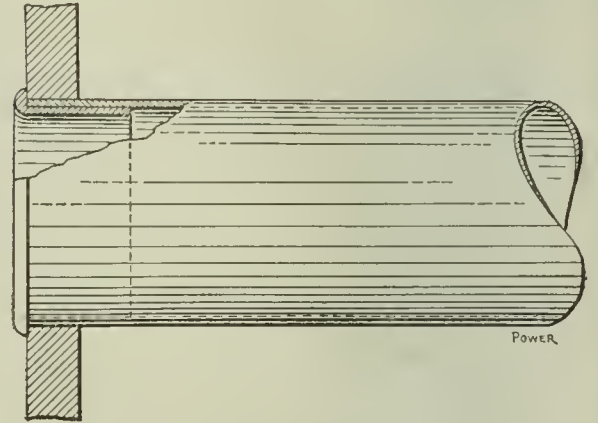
TUBE HELD IN PLACE BY SMALL SECTION AT END
